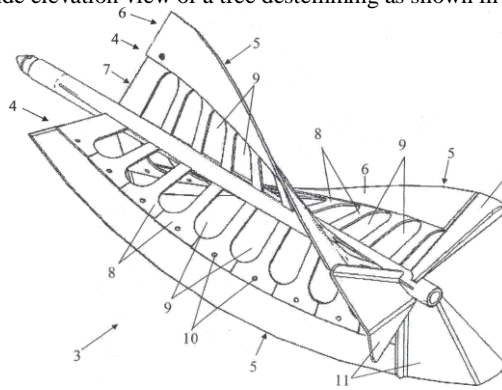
Is a perspective view of destemming the shaft shown in FIG 3;
